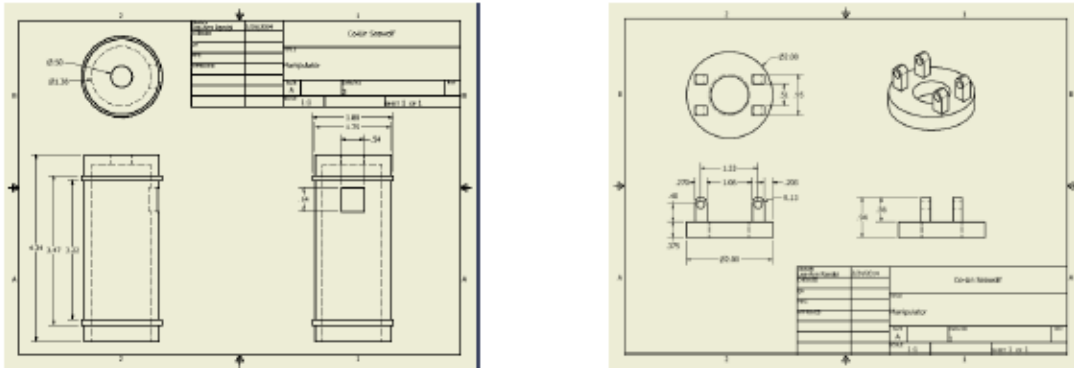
Technical illustrations of the manipulator's ABS printed actuator housing and aluminum alloy jaw mount.
